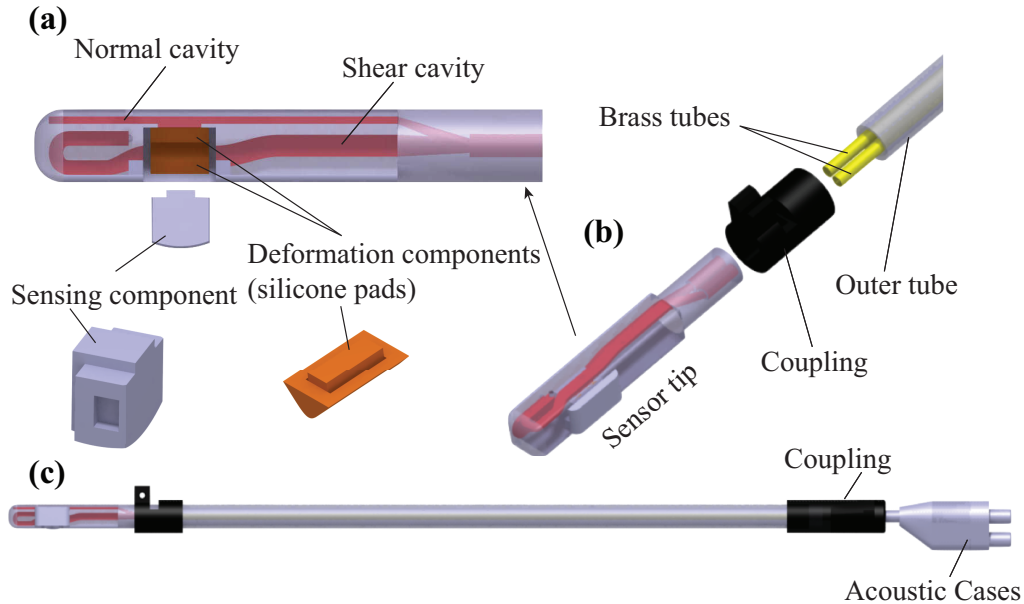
Design of the tactile sensor (a) Sensor tip components. (b) Tactile sensor components. (c) Fully assembled sensor
